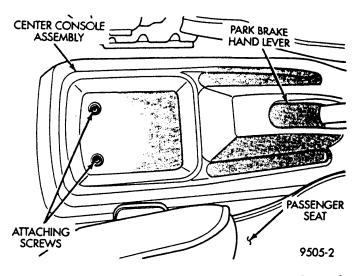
Attaching Screws At Rear Of Center Console W/O Arm Rest
